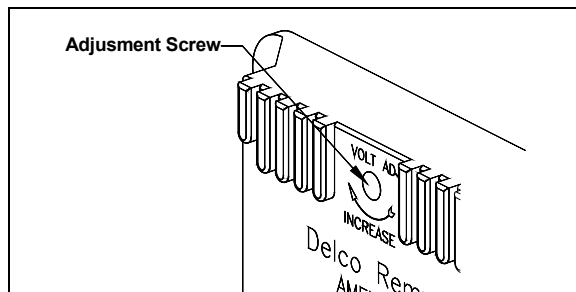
ADJUSTING REGULATOR VOLTAGE SETTING 06418
